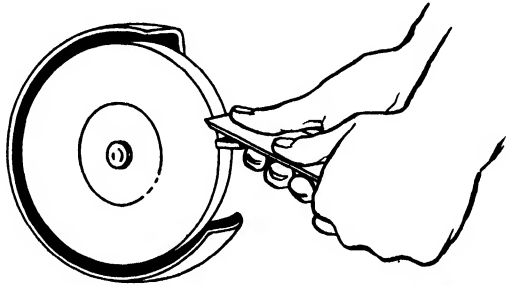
A good method of holding the tool when grinding with a hand grinder. Adjust the tool rest to give the desired angle of bevel and hold the tool firmly against the rest. Move the tool back and forth sideways across the face of the wheel.
